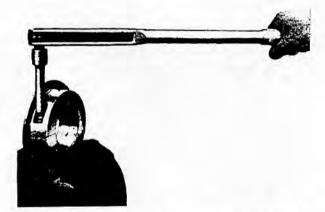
TIGHTENING SOCKET SCREWS OF FRONT BEARING HOUSING USING SERVICE TOOL MF113 WITH TORQUE WRENCH
